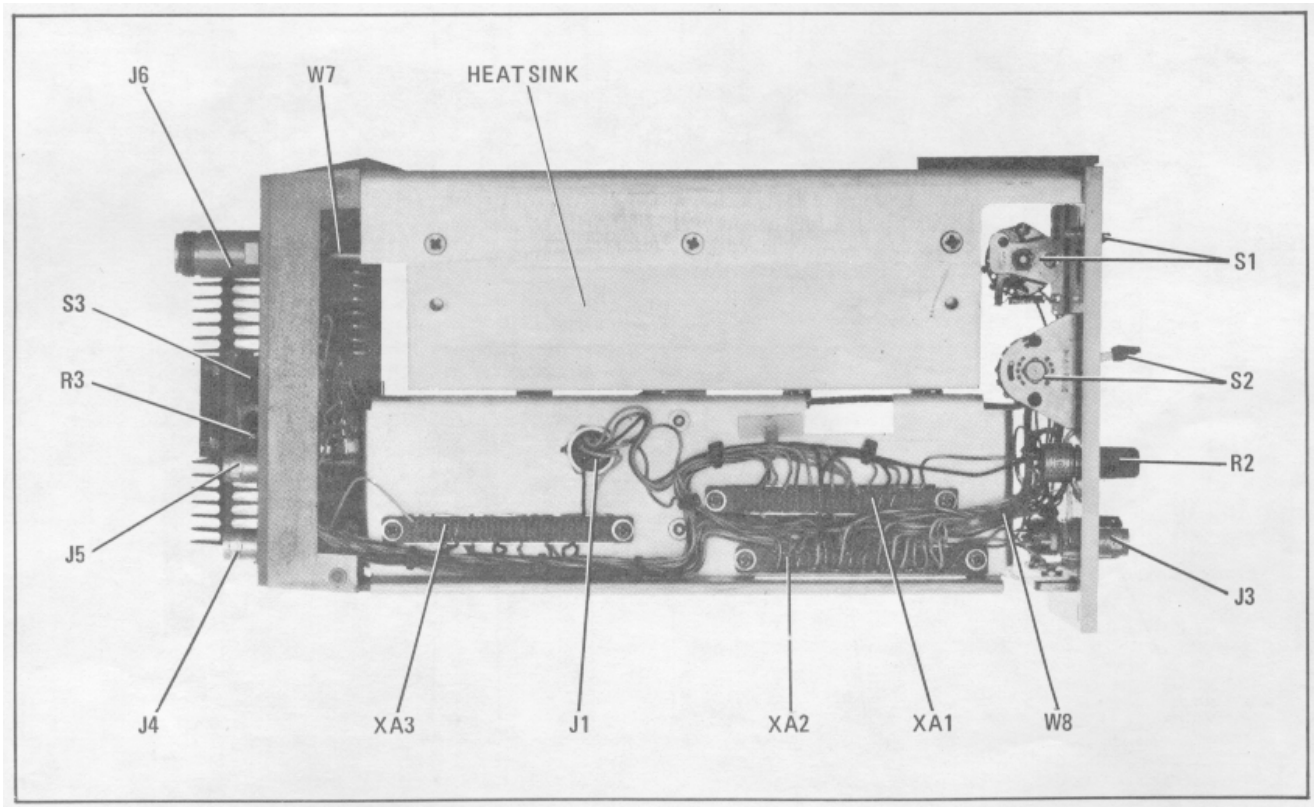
Location of Major Assemblies, Bottom View (Option 001/004)
